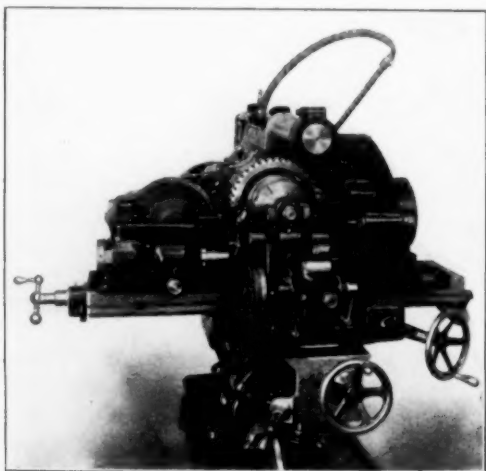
MILLING MACHINE WITH SPECIAL EQUIPMENT MORE EXPENSIVE THAN MACHINE PROPER
